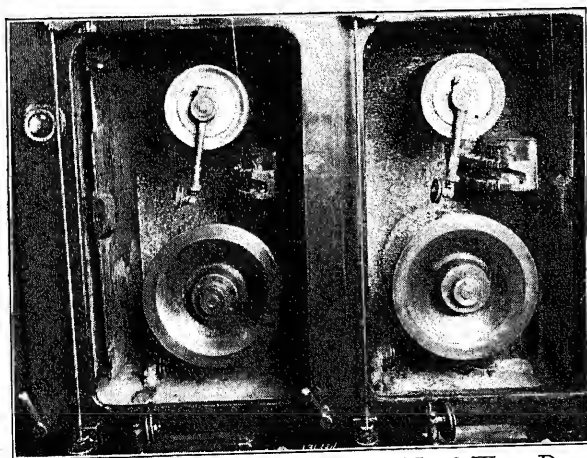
CLOSE-UP VIEW OF UNITS OF NO. 3 WIRE-DRAWING MACHINE
